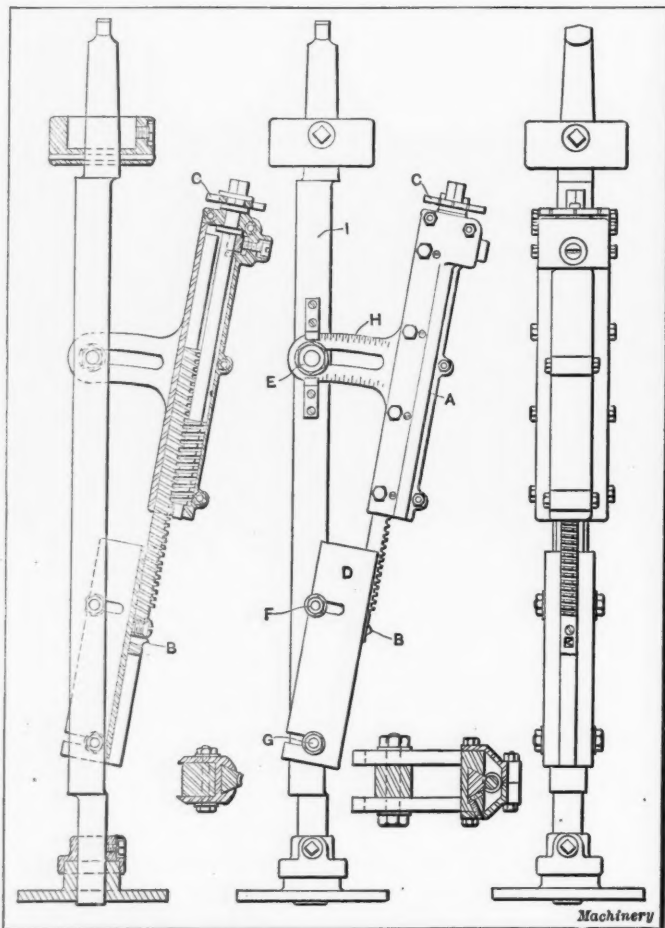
General Design of Portable Boring-bar for Straight and Taper Holes
